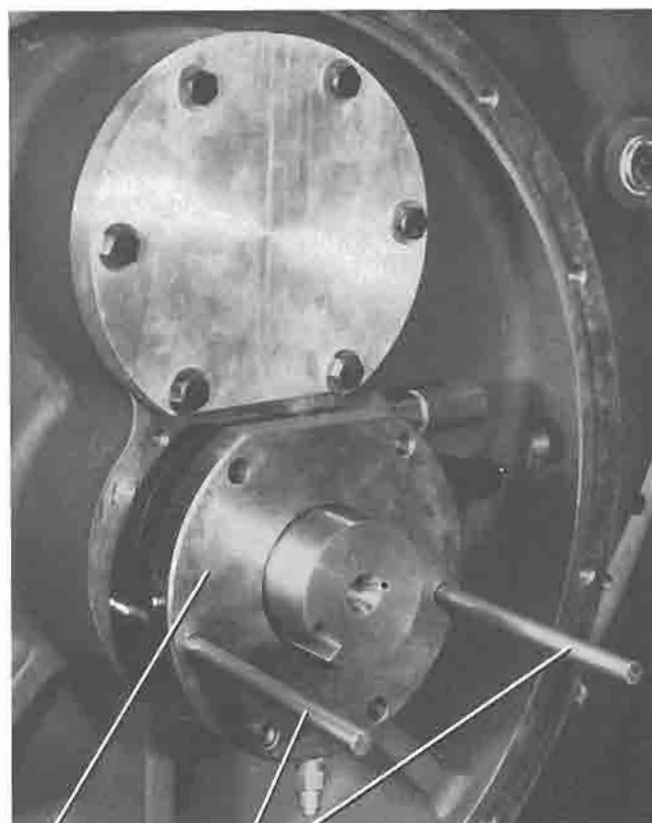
REMOVING SEAL COVER PLATE WITH SEAL
